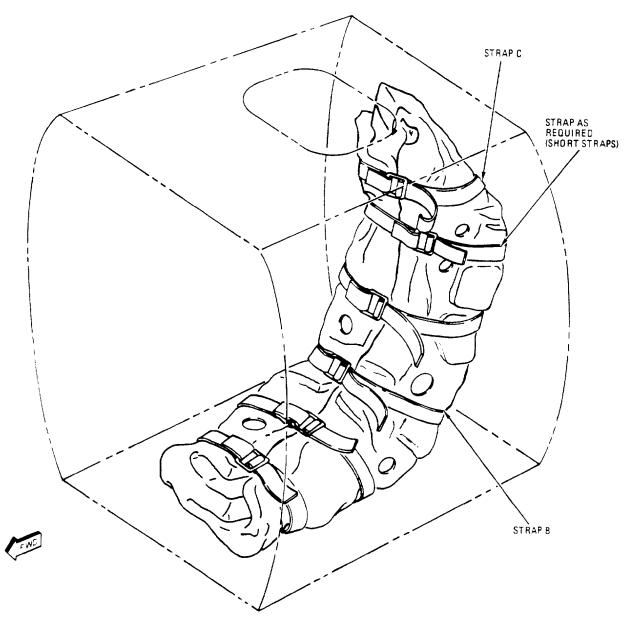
Removal - No. 2 Fuel Tank Folding (Sheet 10)
